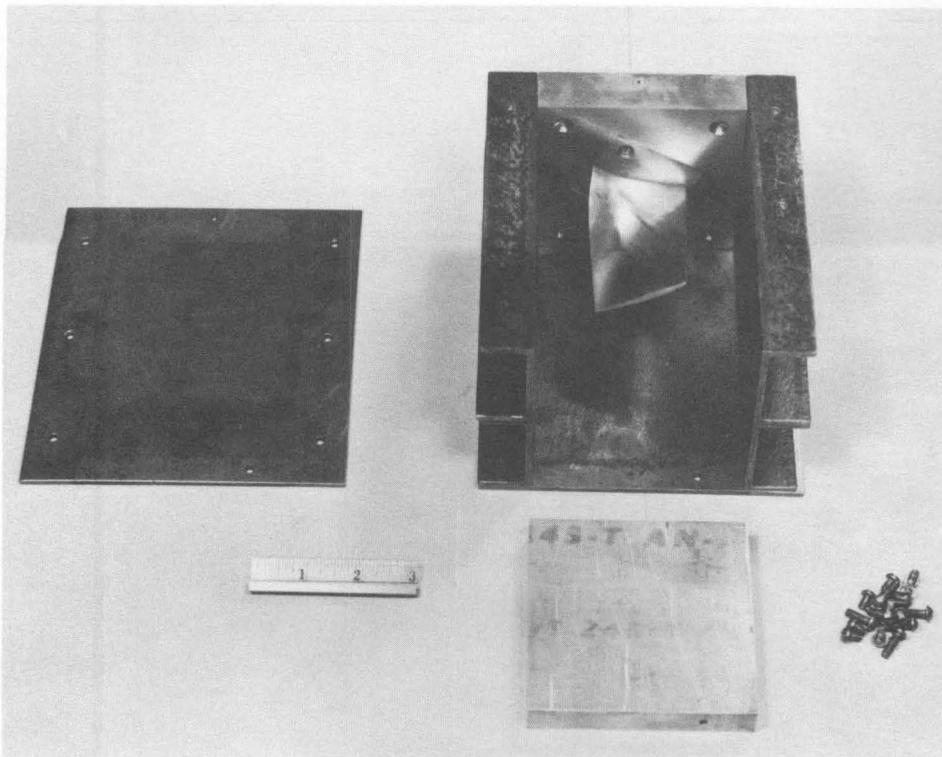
Mold box partially assembled with master blade attached to end piece.
